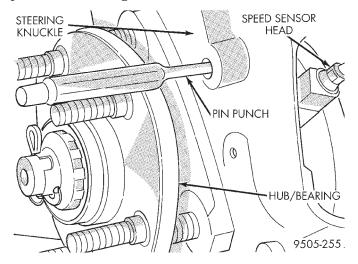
Speed Sensor Head Removal From Steering Knuckle
